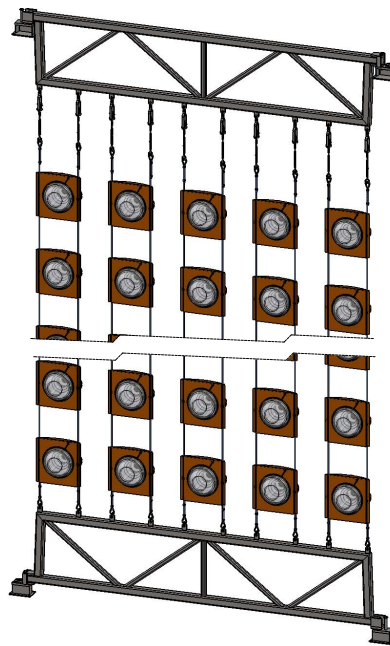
Linear PIU connection to deck and floor (most PA's omitted)
